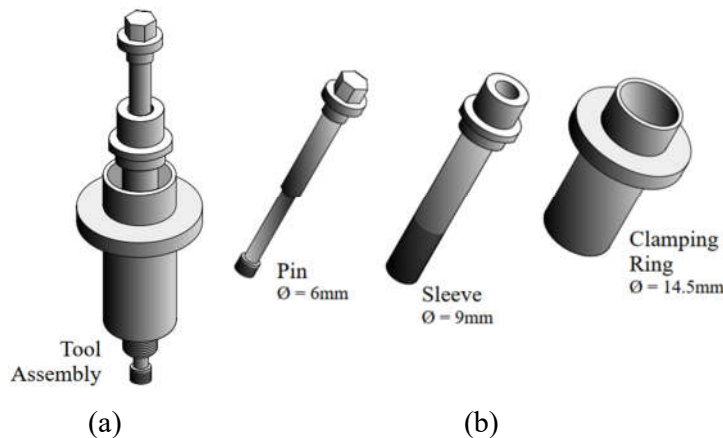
(a) RFSSW tool assembly of the 3-piece tool (b) parts of the tool: pin, sleeve and clamping ring
